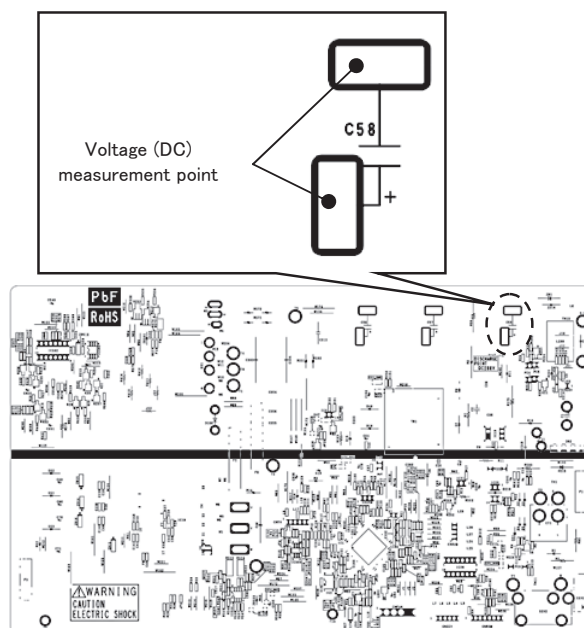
Voltage measurement point (Solder face of PCB (Main))
